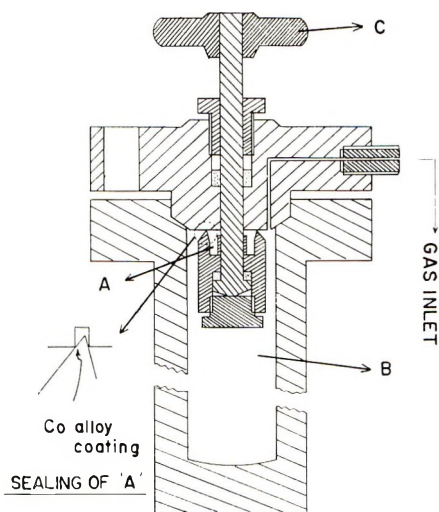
Reactor assembly: (A) container of the initiator, (B) main reactor chamber, (C) handle for opening and closing the container.
